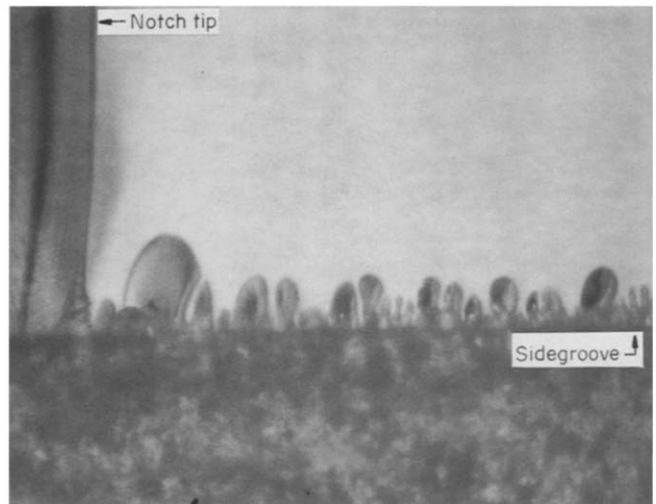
View of the deformed but not fractured shear plane of a side-grooved prismatic specimen
